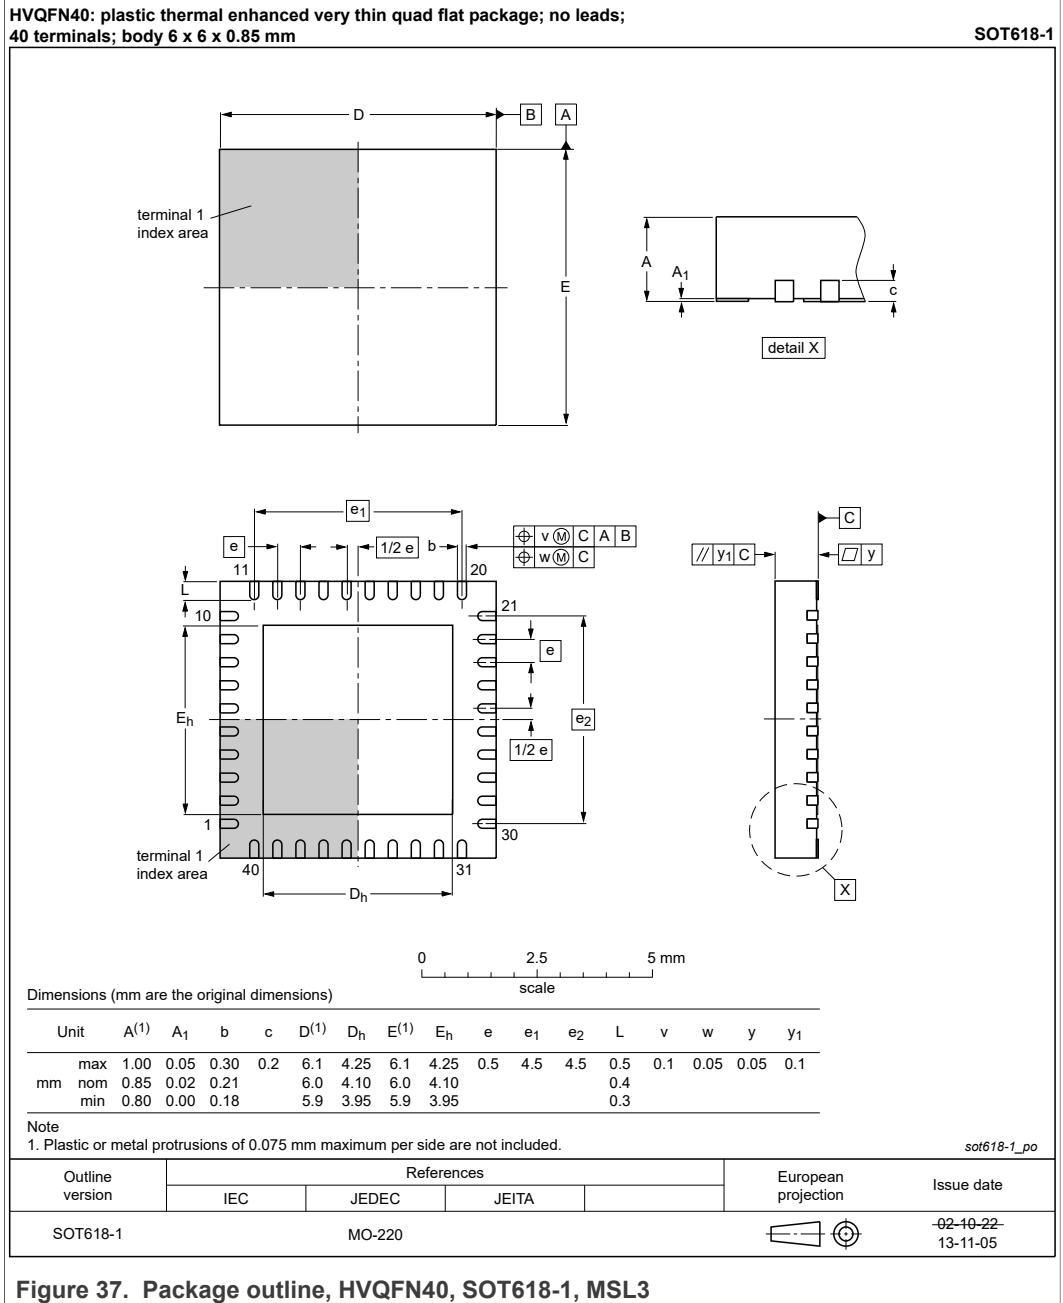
Package outline, HVQFN40, SOT618-1, MSL3
